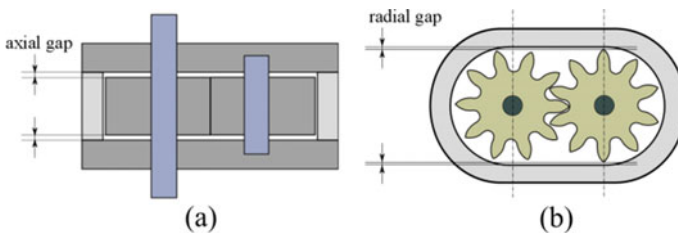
Types of internal clearances of external gear pump. a Gear side clearance, b gear tip clearance
